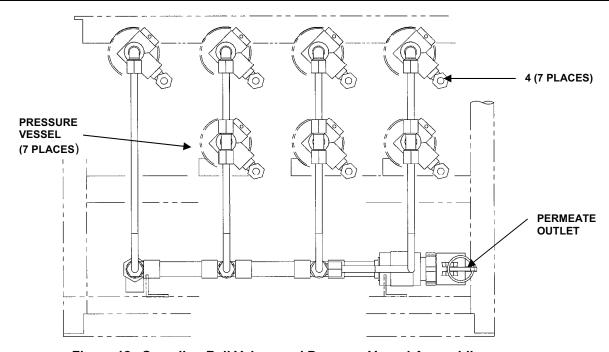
Sampling Ball Valves and Pressure Vessel Assemblies.
